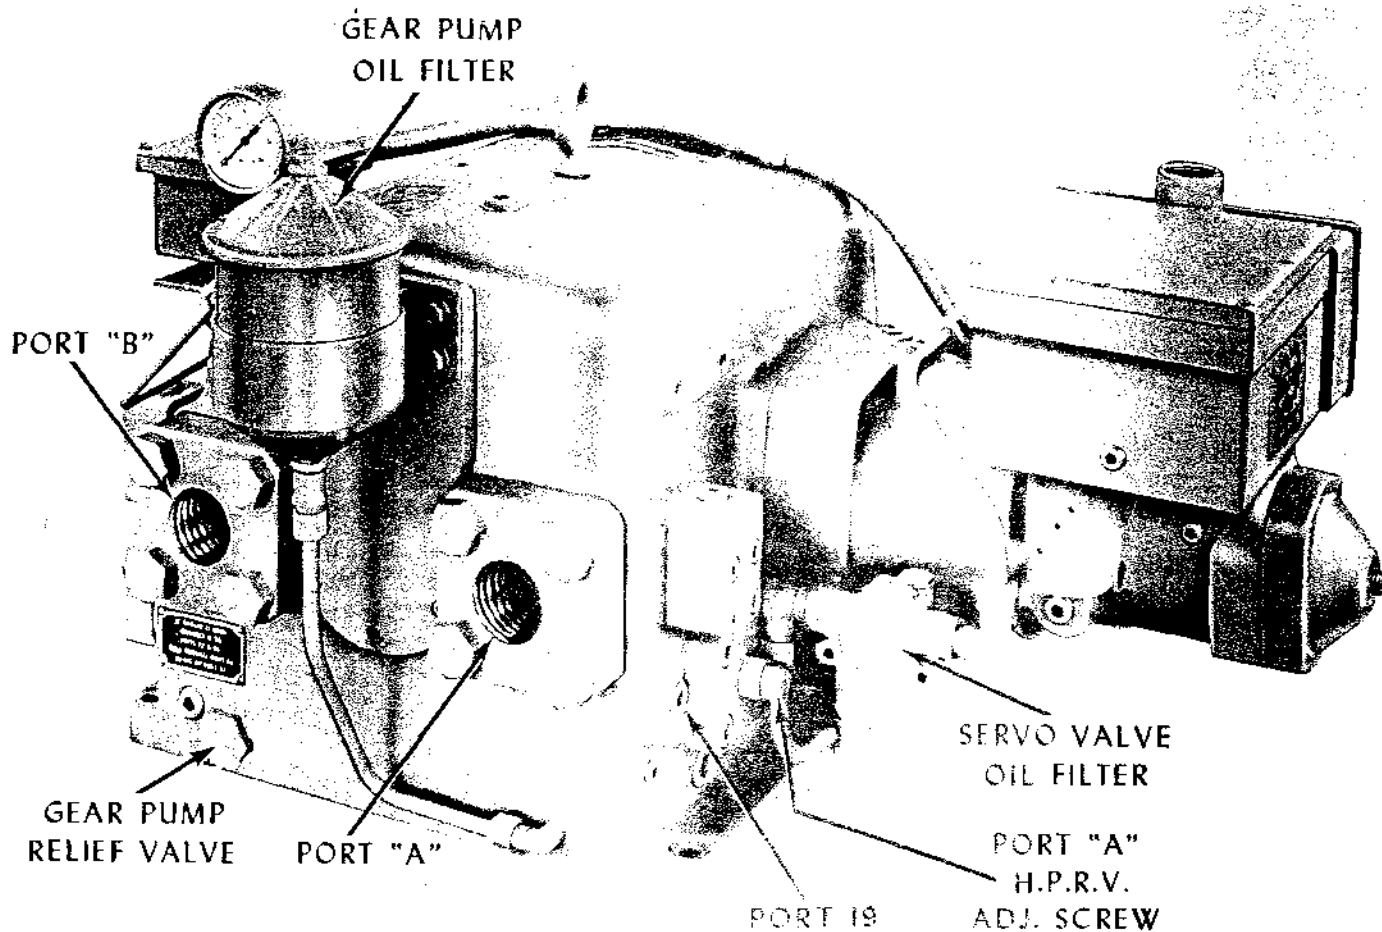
TYPE "DV" PUMP, FLANGE END.
